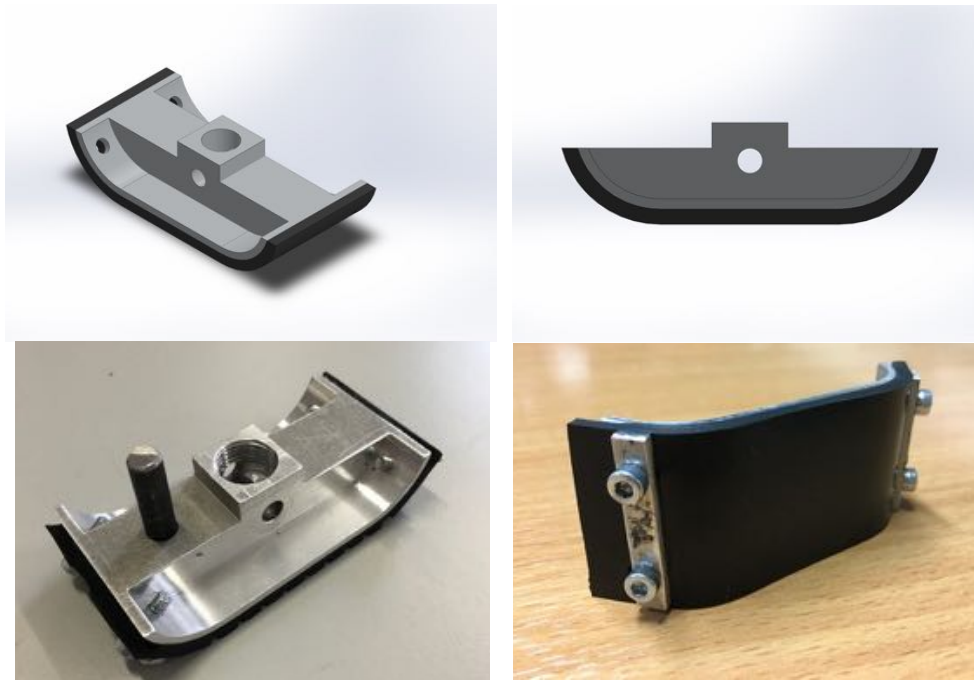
Top: CAD model of the test shoe slider. Bottom: Manufactured test shoe slider.
